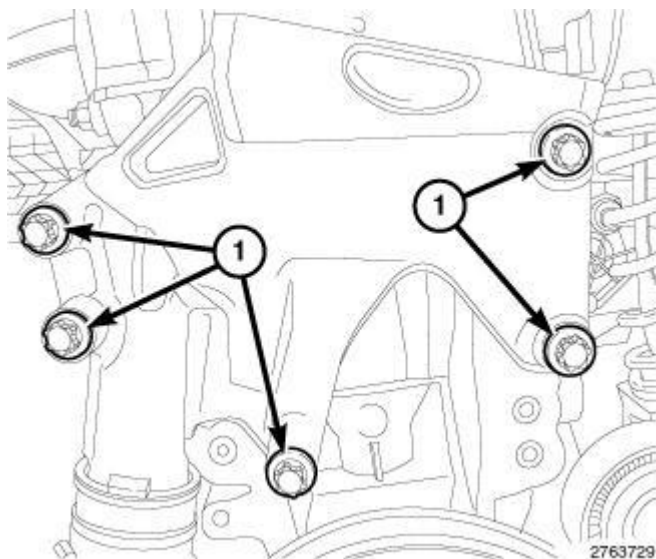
Engine Mount, Bracket & Through Bolt
